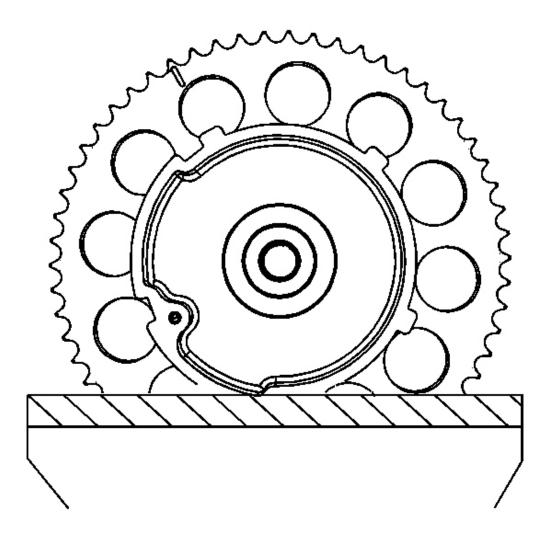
Ensuring Wording Is Level Courtesy of GENERAL MOTORS CORP.
